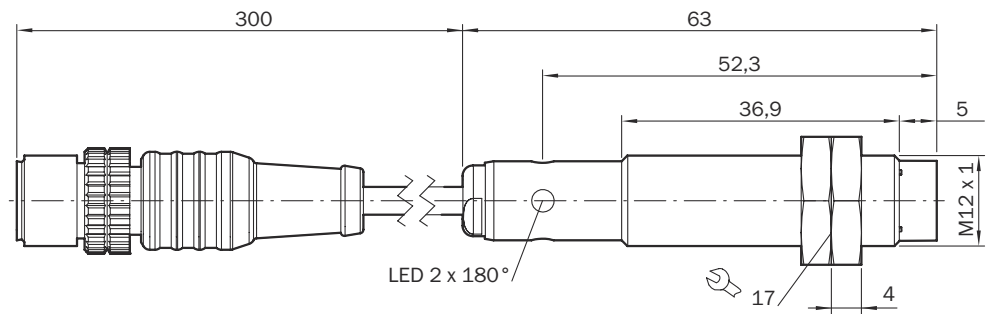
IME2S12-\*\*N\*\*Q9 dimensional drawing
